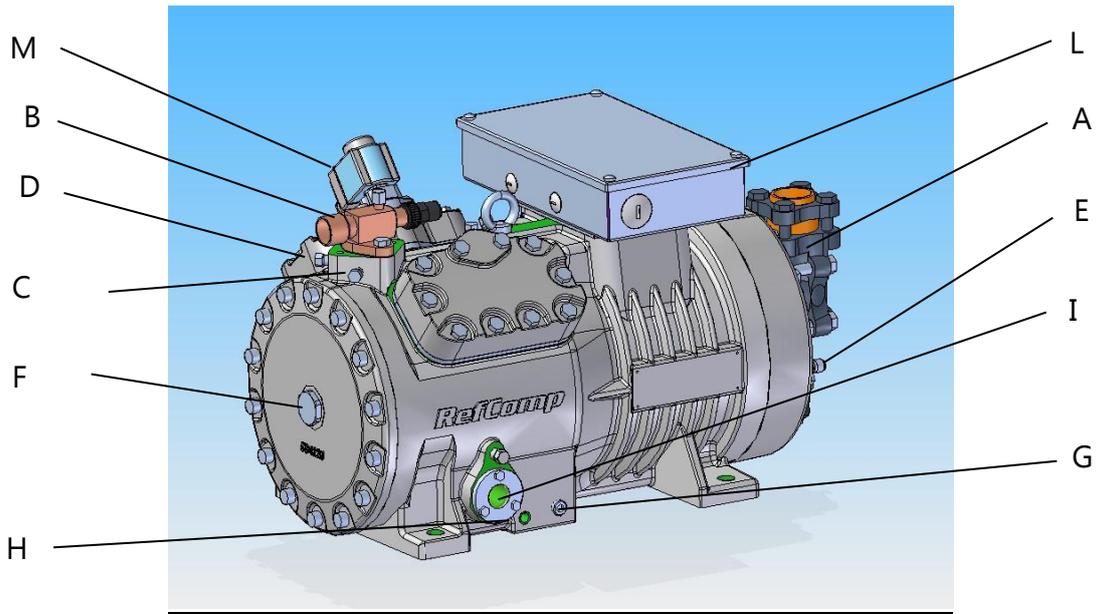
Model PP4-L/HNxx (splasher lubrication)
